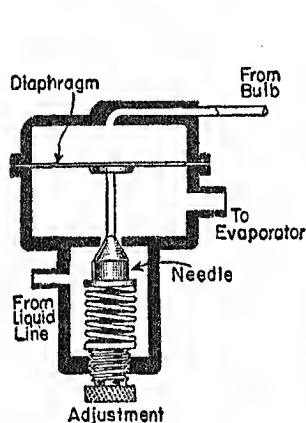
Adjustment Principle of a Diaphragm Type Thermostatic Expansion Valve.
